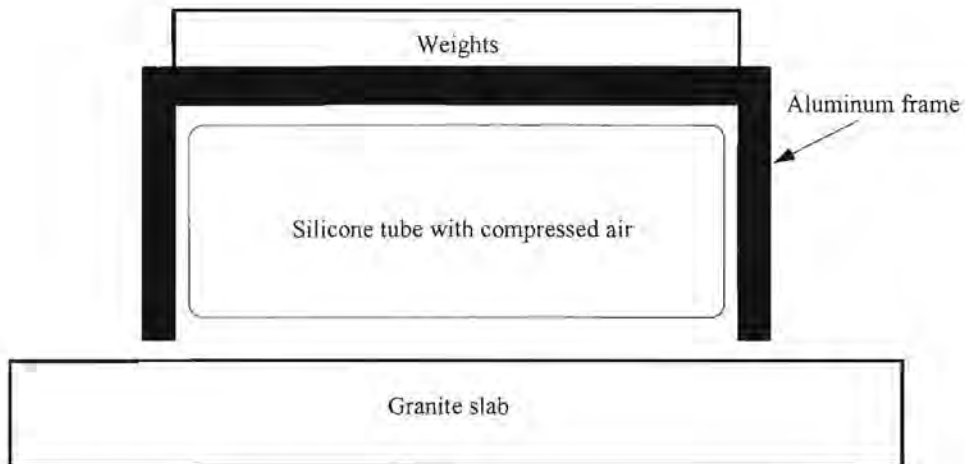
Drawing visualizing the application of weld pressure using pneumatically inflated thin-walled silicone rubber tube.
